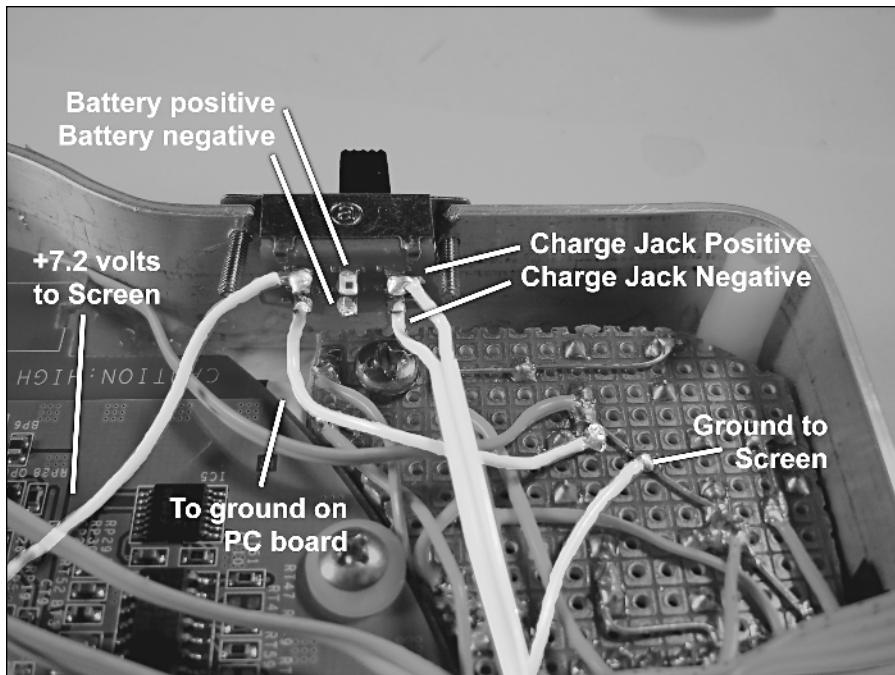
The ON/OFF switch installed, with wiring.
